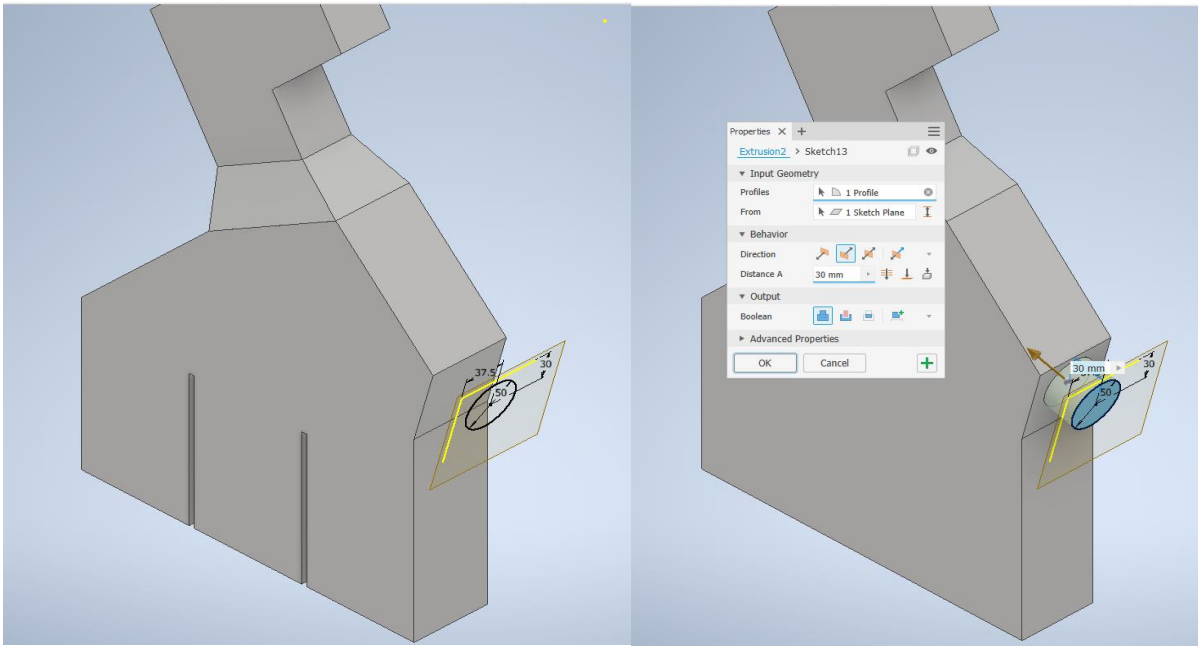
Drawing and Extruding the Circle for part of the inlet section
